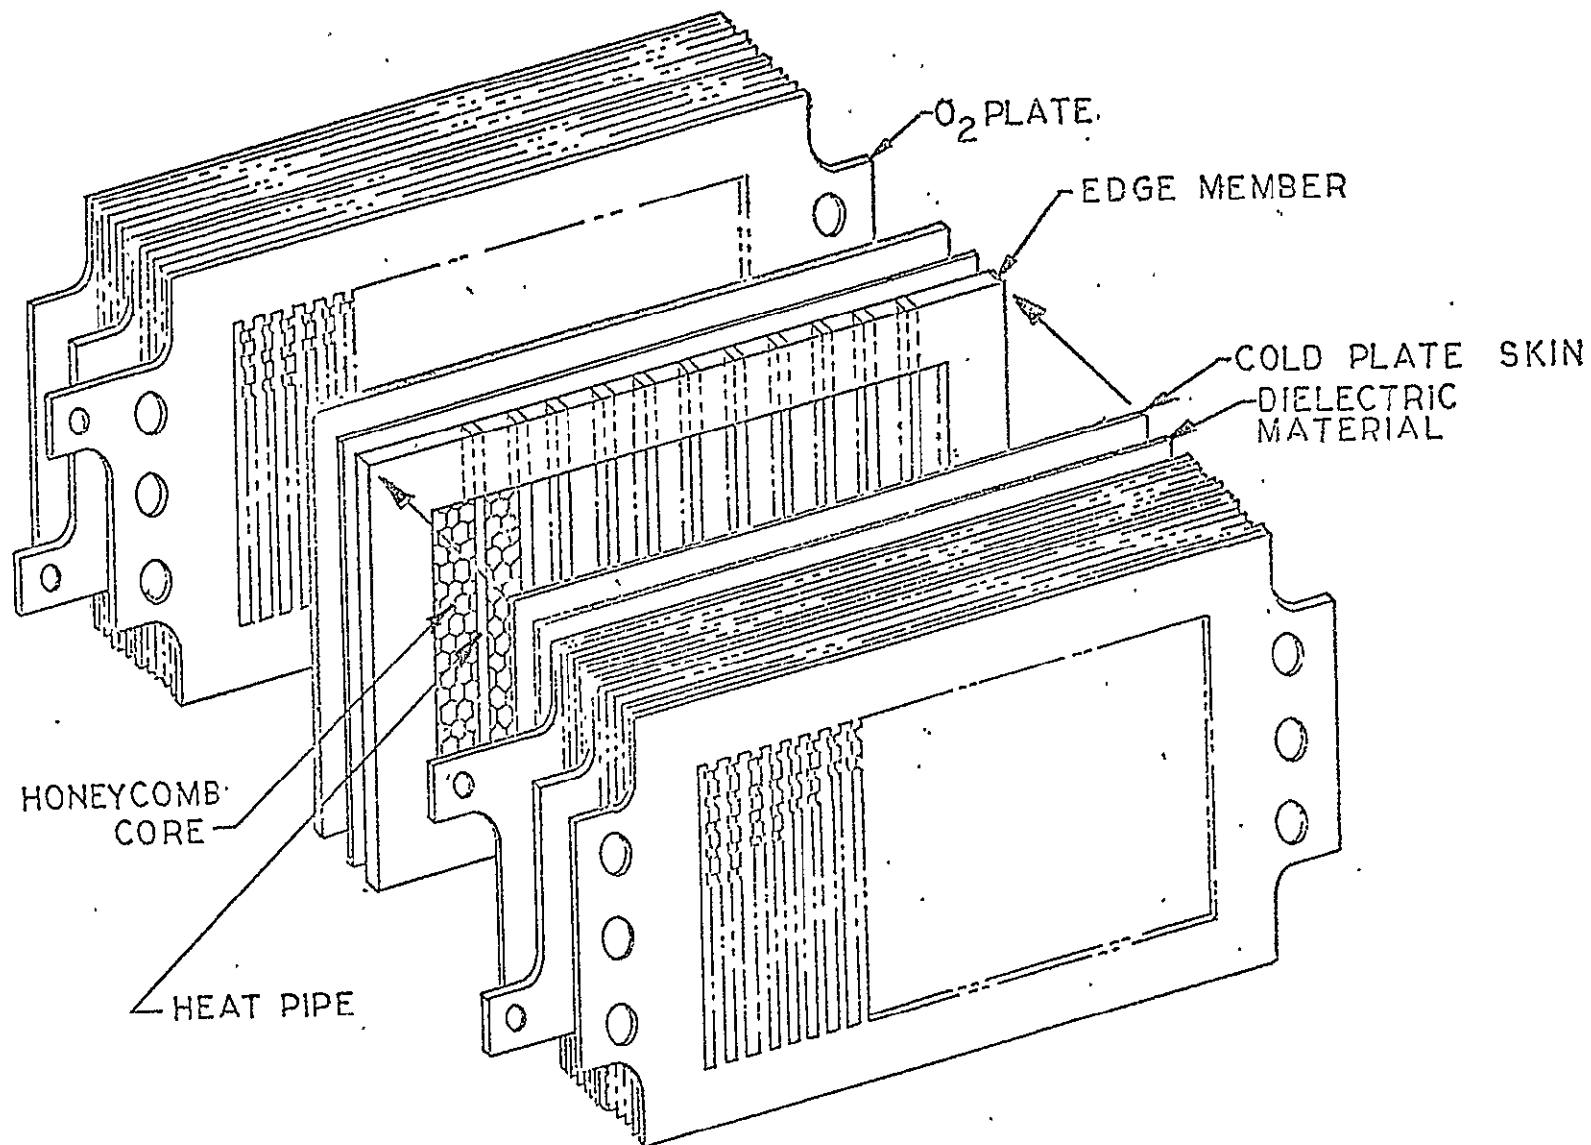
Heat Pipe/Cell Plate Assembly
